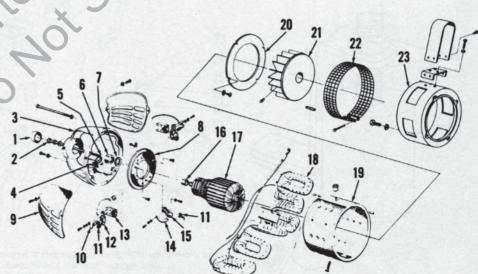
Exploded view of typical high-cycle generator.
